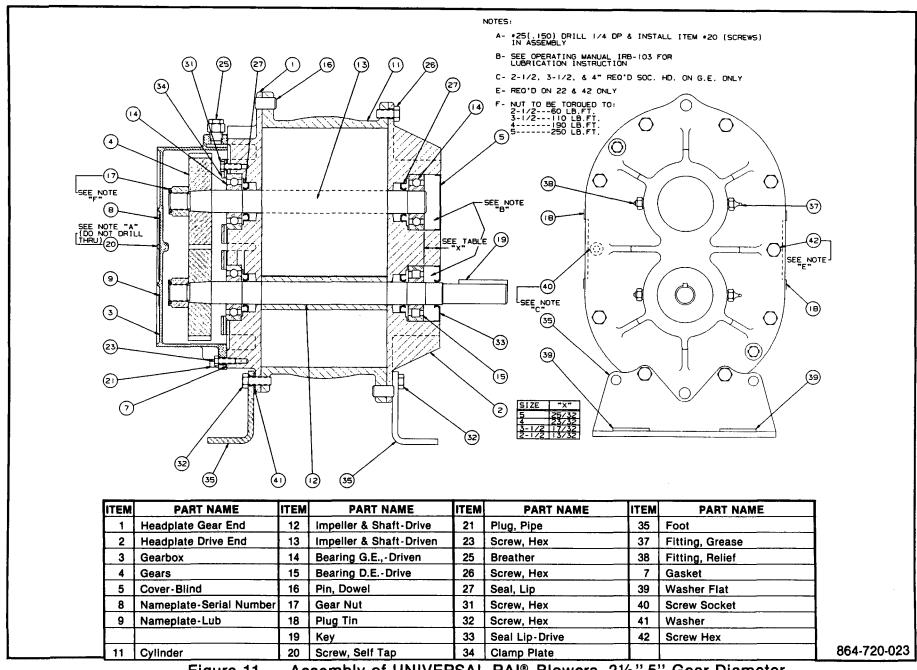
Assembly of UNIVERSAL RAI® Blowers, 21/2"-5" Gear Diameter
